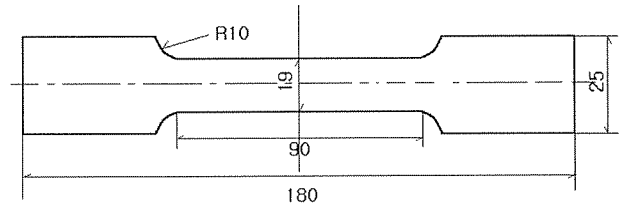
The shape and demension of tension test specimen(t=1 mm)
